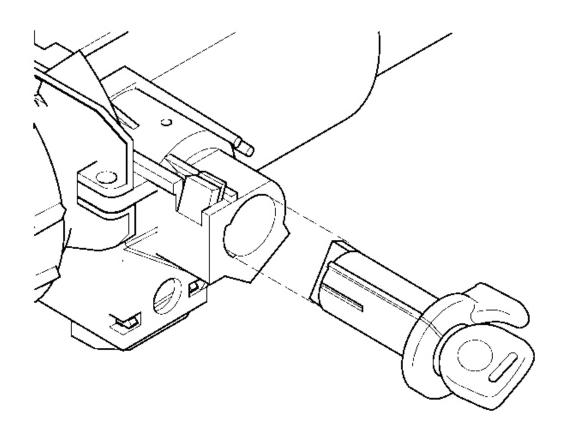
View Of Lock Cylinder At Lock Cylinder Housing Courtesy of GENERAL MOTORS CORP.
